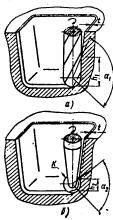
Arrangement of volumetric parallel-series machining of the surface with the existing (a) and the improved (b) tracer-copying cutters.
